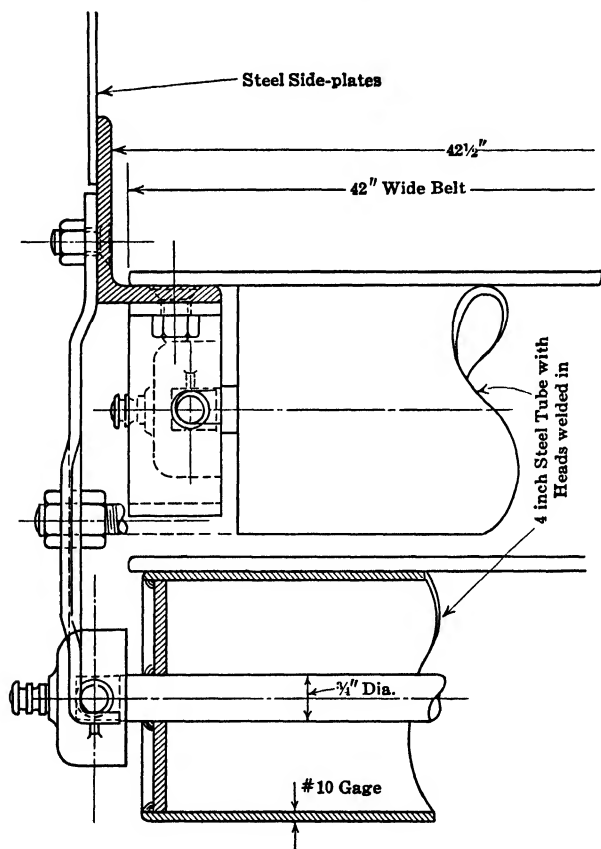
Cross Section of 42-inch Mail-bag Conveyor.
